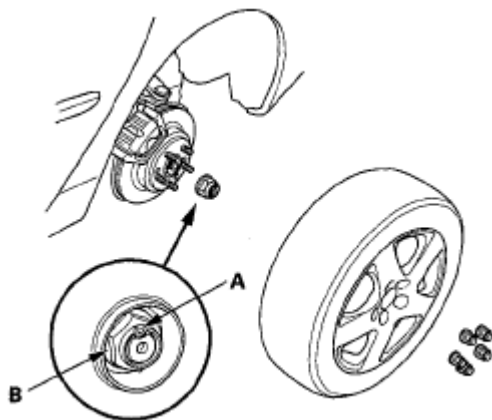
Identifying Wheel Nuts And Spindle Nut
